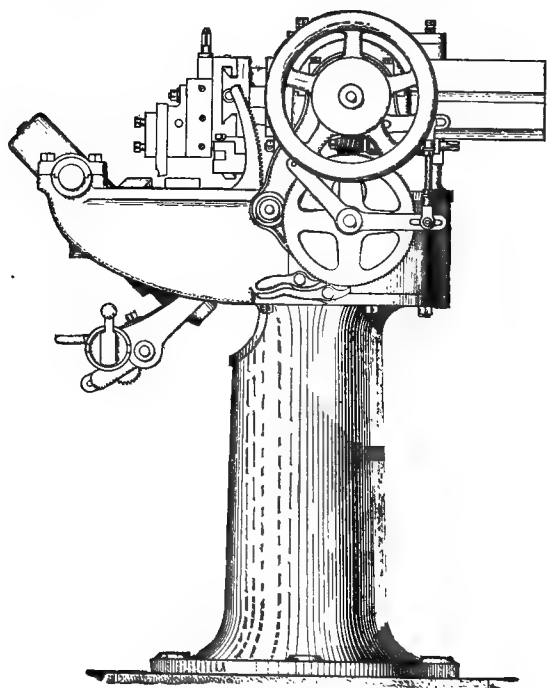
Machine for planing the teeth of bevel gears; by the Oerlikon Machine Works.
